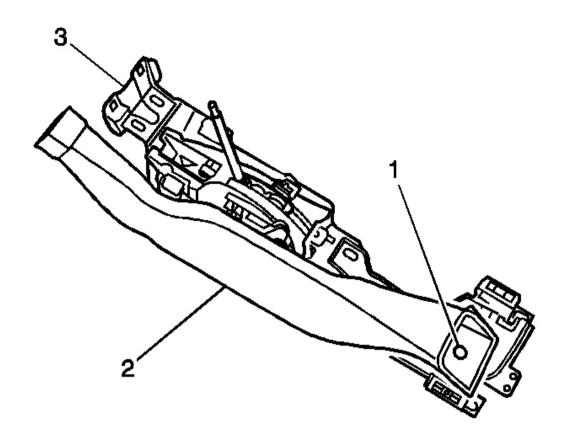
Identifying Push Pin (Rear Floor) Courtesy of GENERAL MOTORS CORP.
